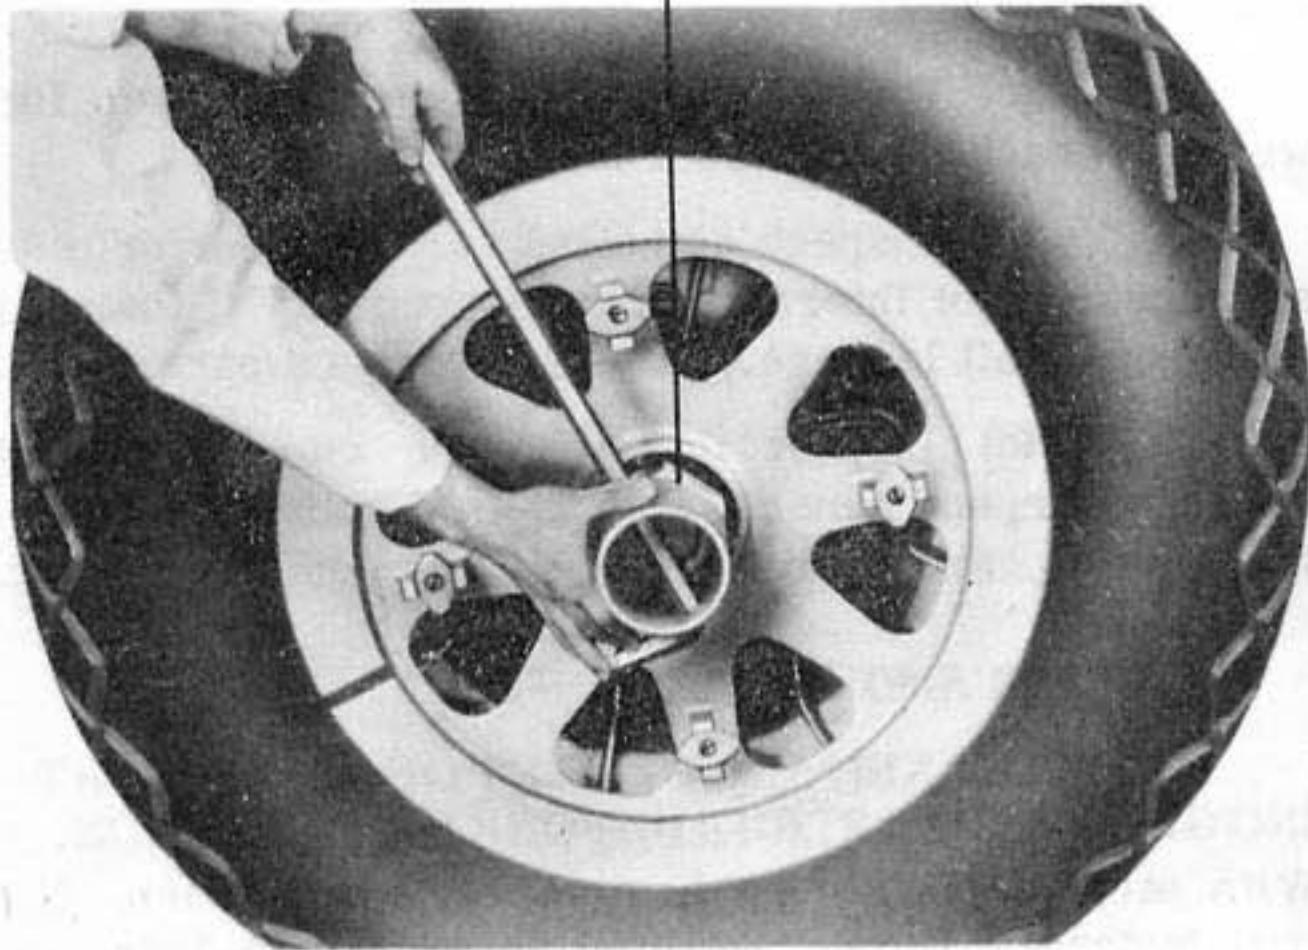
REMOVING MAIN ALIGHTING GEAR WHEEL
